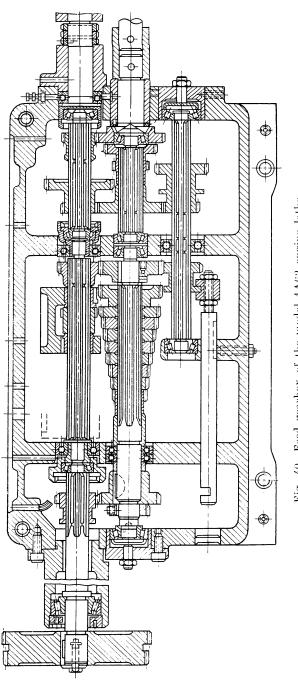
Feed gearbox of the model 1A62 engine lathe
